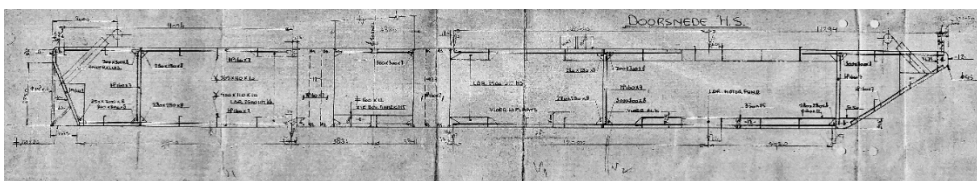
C.L. section "Crane ponton construction plan" [2]
